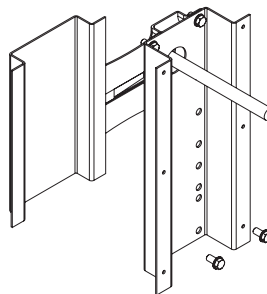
Orientation of Stand Off Bracket for a jackshaft driven damper
